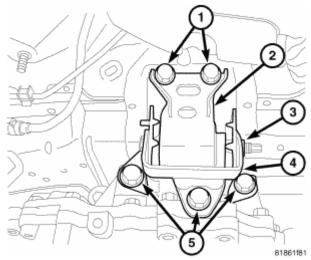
LEFT MOUNT Courtesy of CHRYSLER LLC
